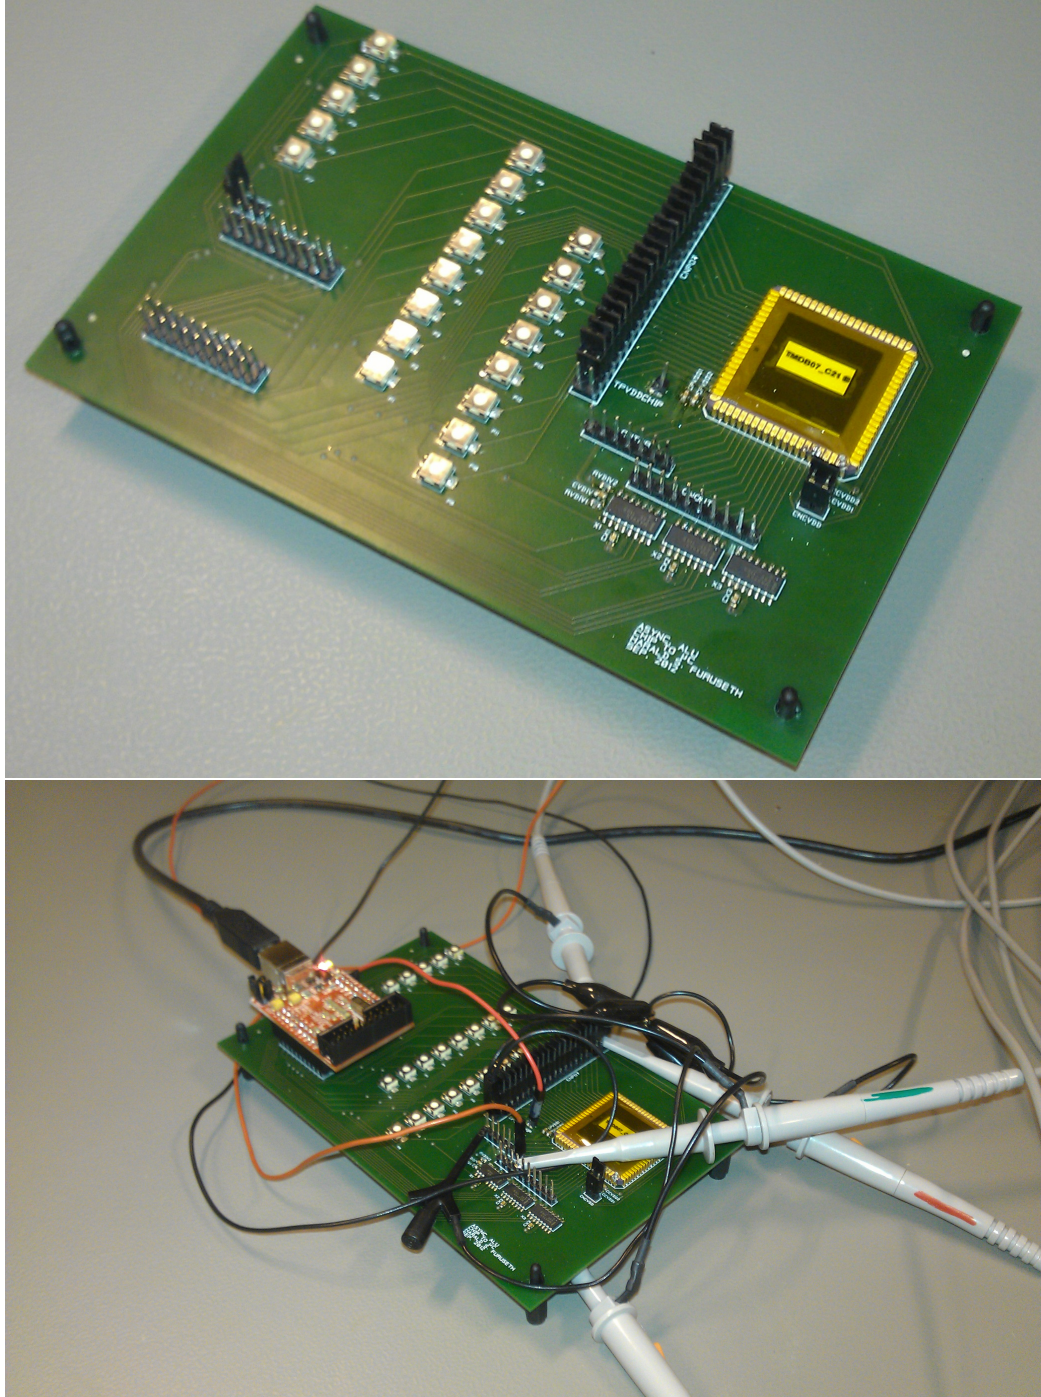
Top: Photograph of the finished PCB. Bottom: Photograph of the finished PCB with microcontroller header board and lab equipment attached, during a testing run.
